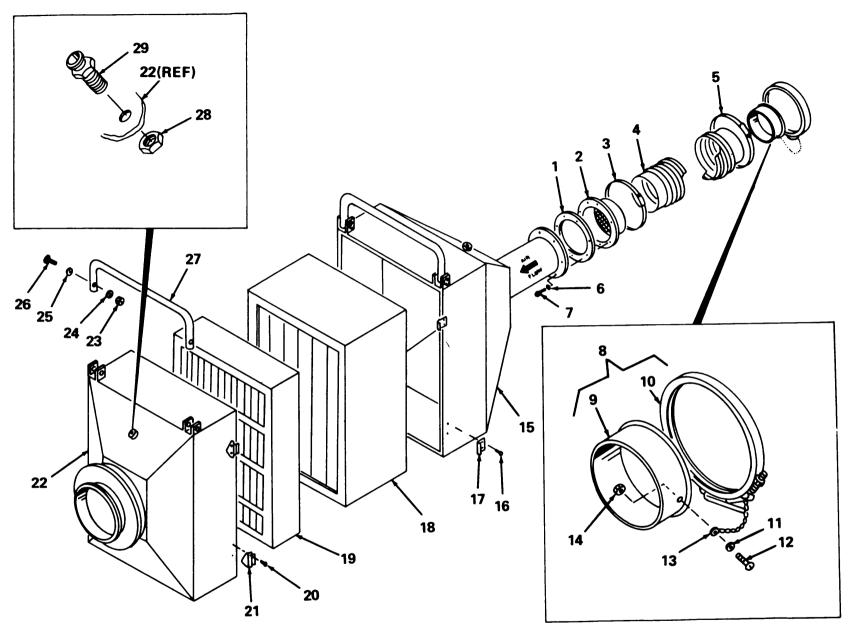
Entrance gas-particulate filter unit, exploded view.
